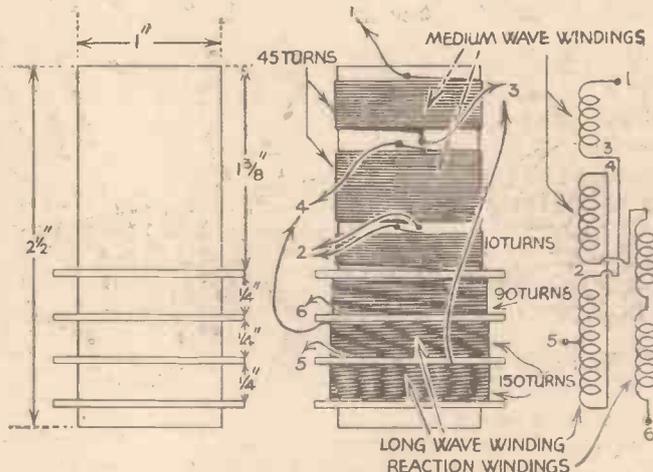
Details of coil former and windings for the medium- and long-wave coil.
